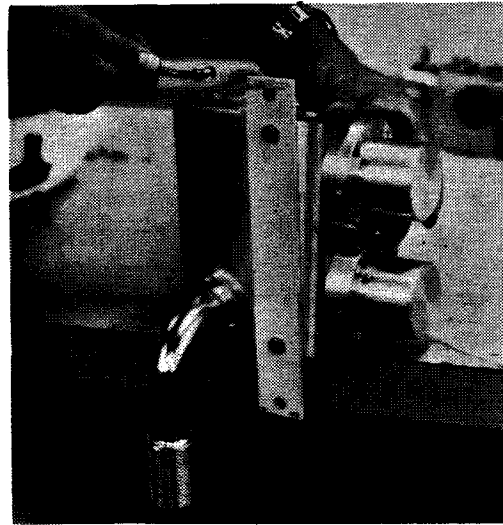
Removing Cover Plate from Inverted Valve Block
